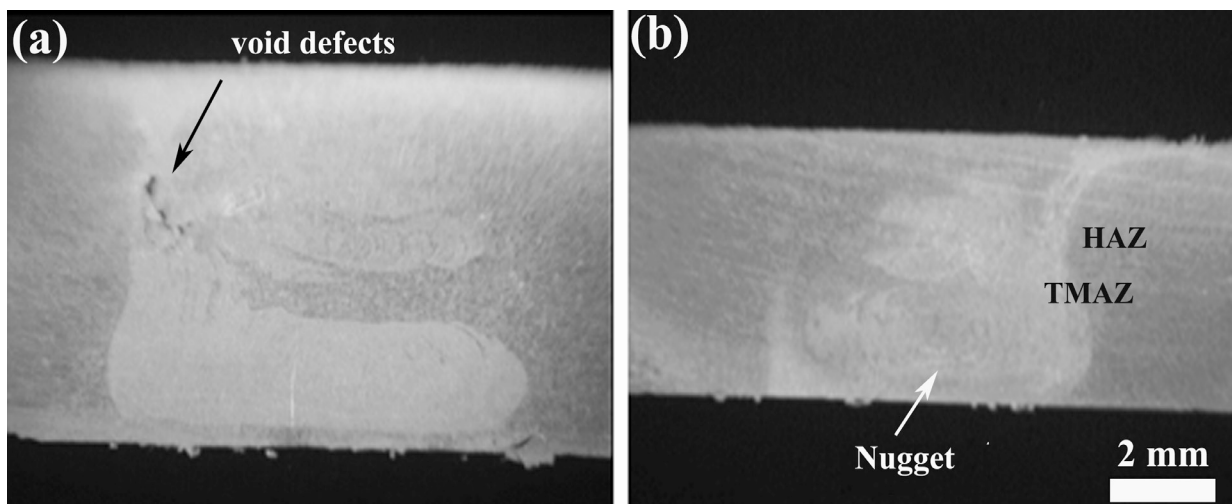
Macrostructure showing the appearance of the friction-stir welded AA6061 joints at 1120 rpm (a) without water cooling, and (b) with water cooling.
